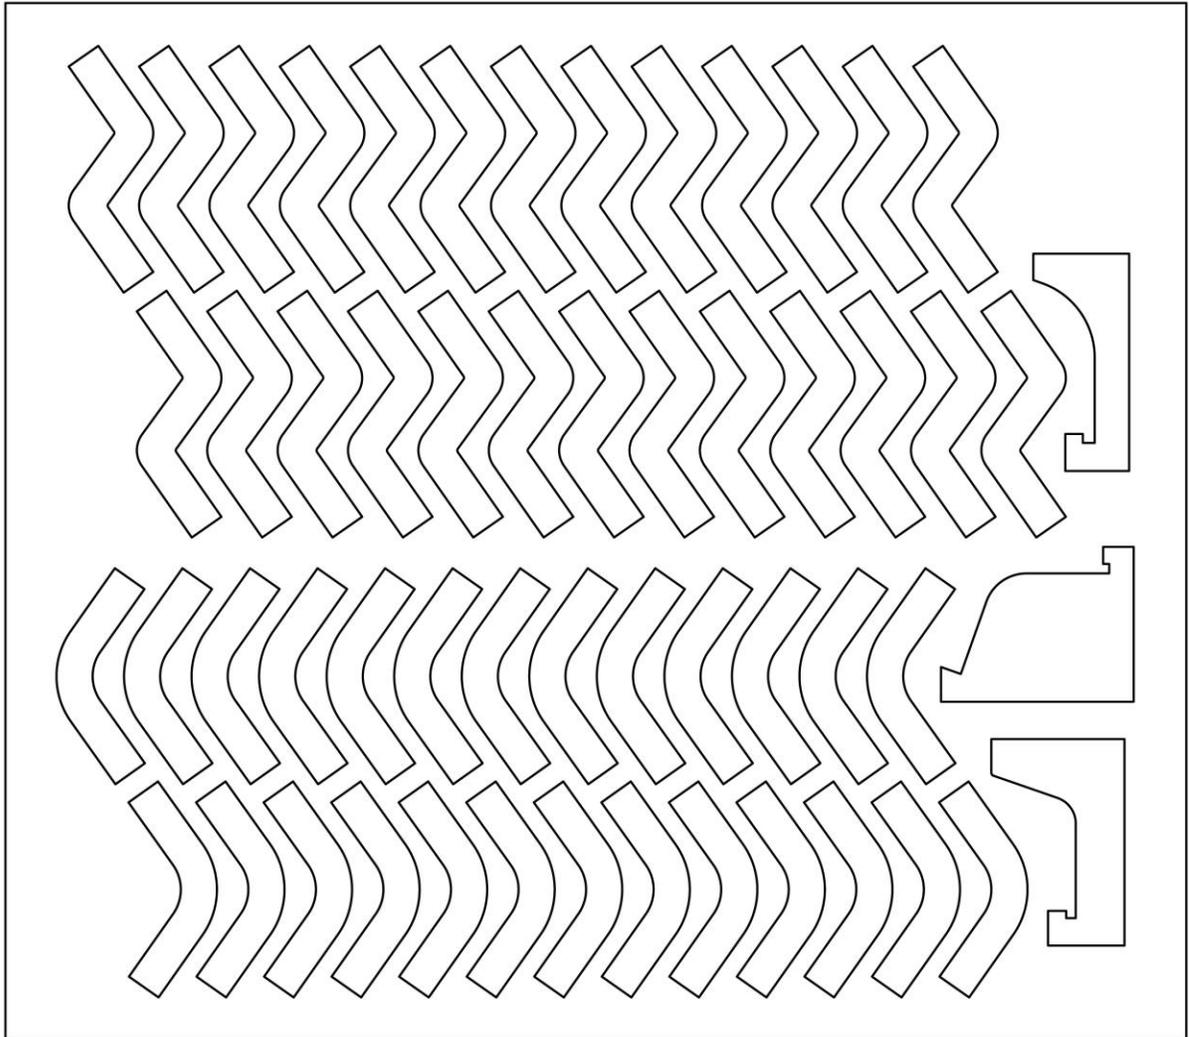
Typical arrangement of parts and jigs on a sheet of half inch MDF.
